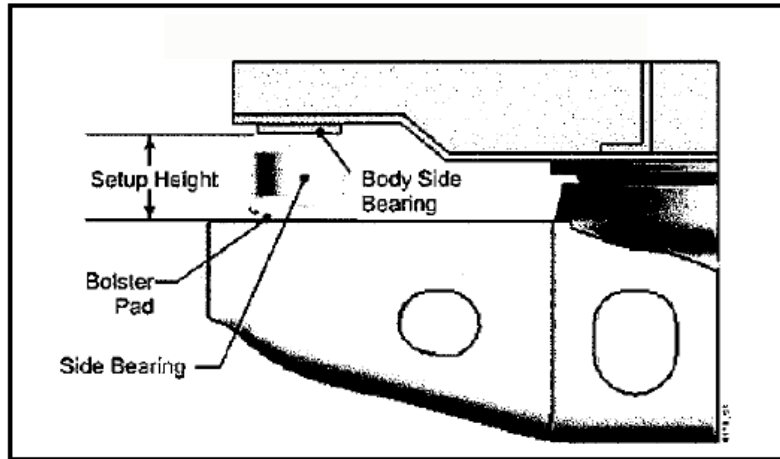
Measurement of constant contact side bearing typically found on 4-axle cars and end trucks of articulated cars
